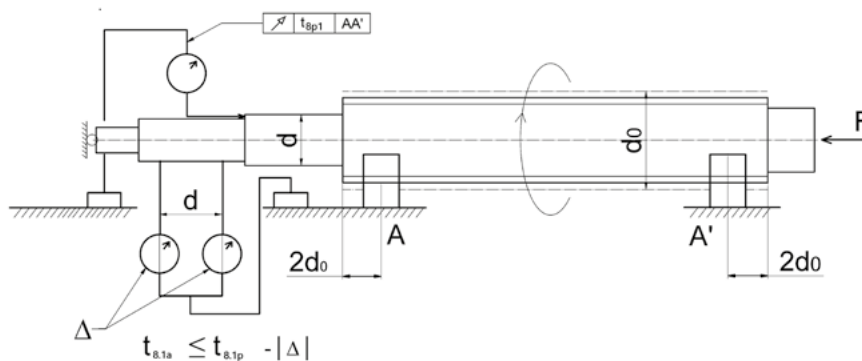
Measurement of the axial run-out $t_{8.1}$ of the bearing surfaces
